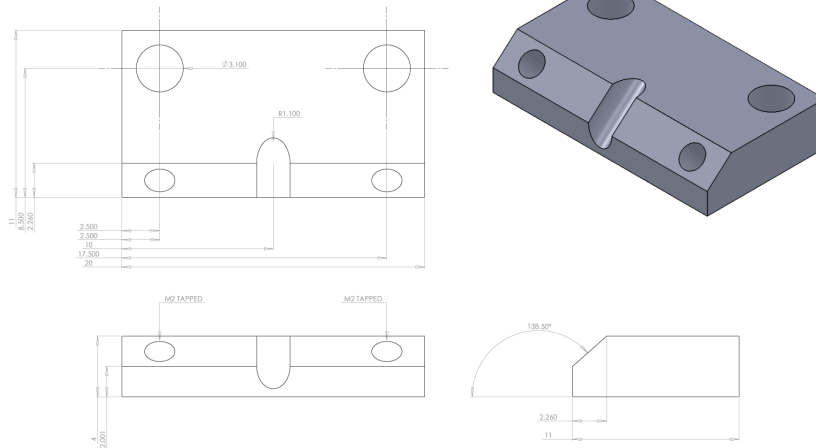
A SolidWorks drawing of the symmetric ion trap oven holder.
